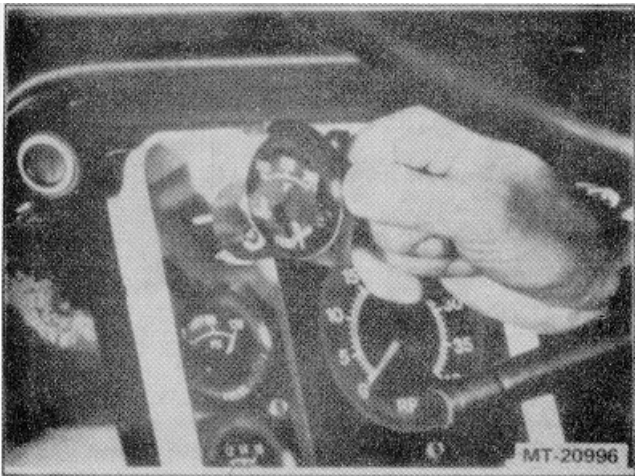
Removing Electrically Actuated Water Temperature Gauge
